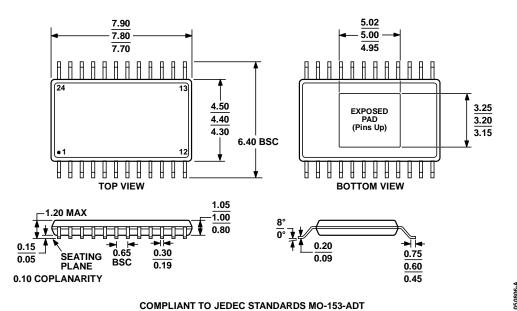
24-Lead Thin Shrink Small Outline Package, Exposed Pad [TSSOP_EP] (RE-24)
